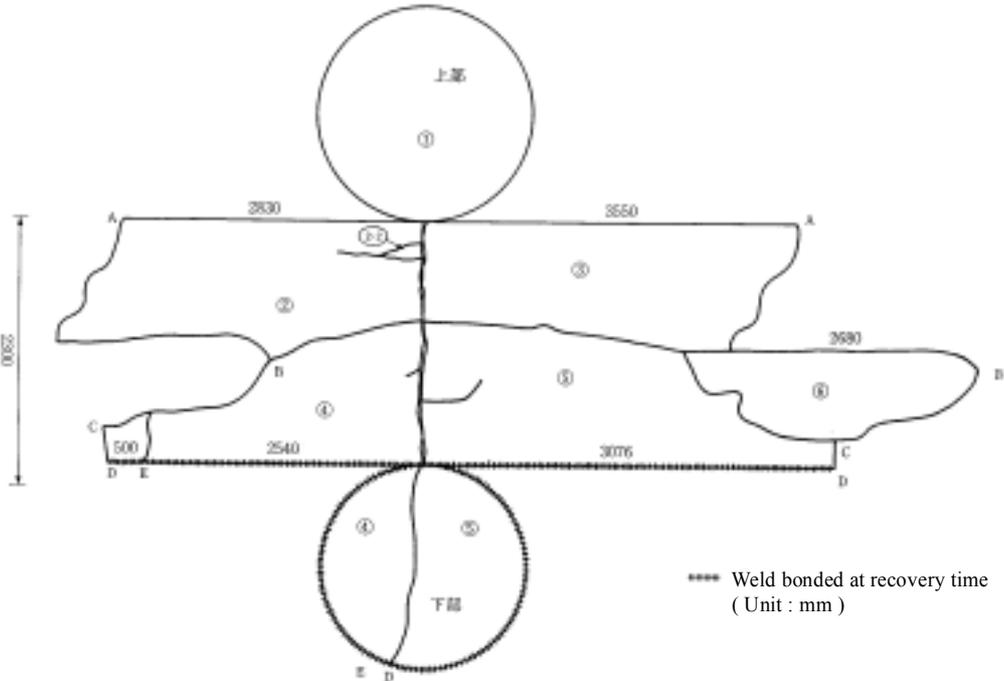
Exploded circumstances of inner vessel (Stainless steel).
